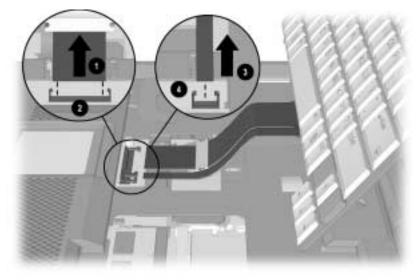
Releasing and Disconnecting the Keyboard Cables
